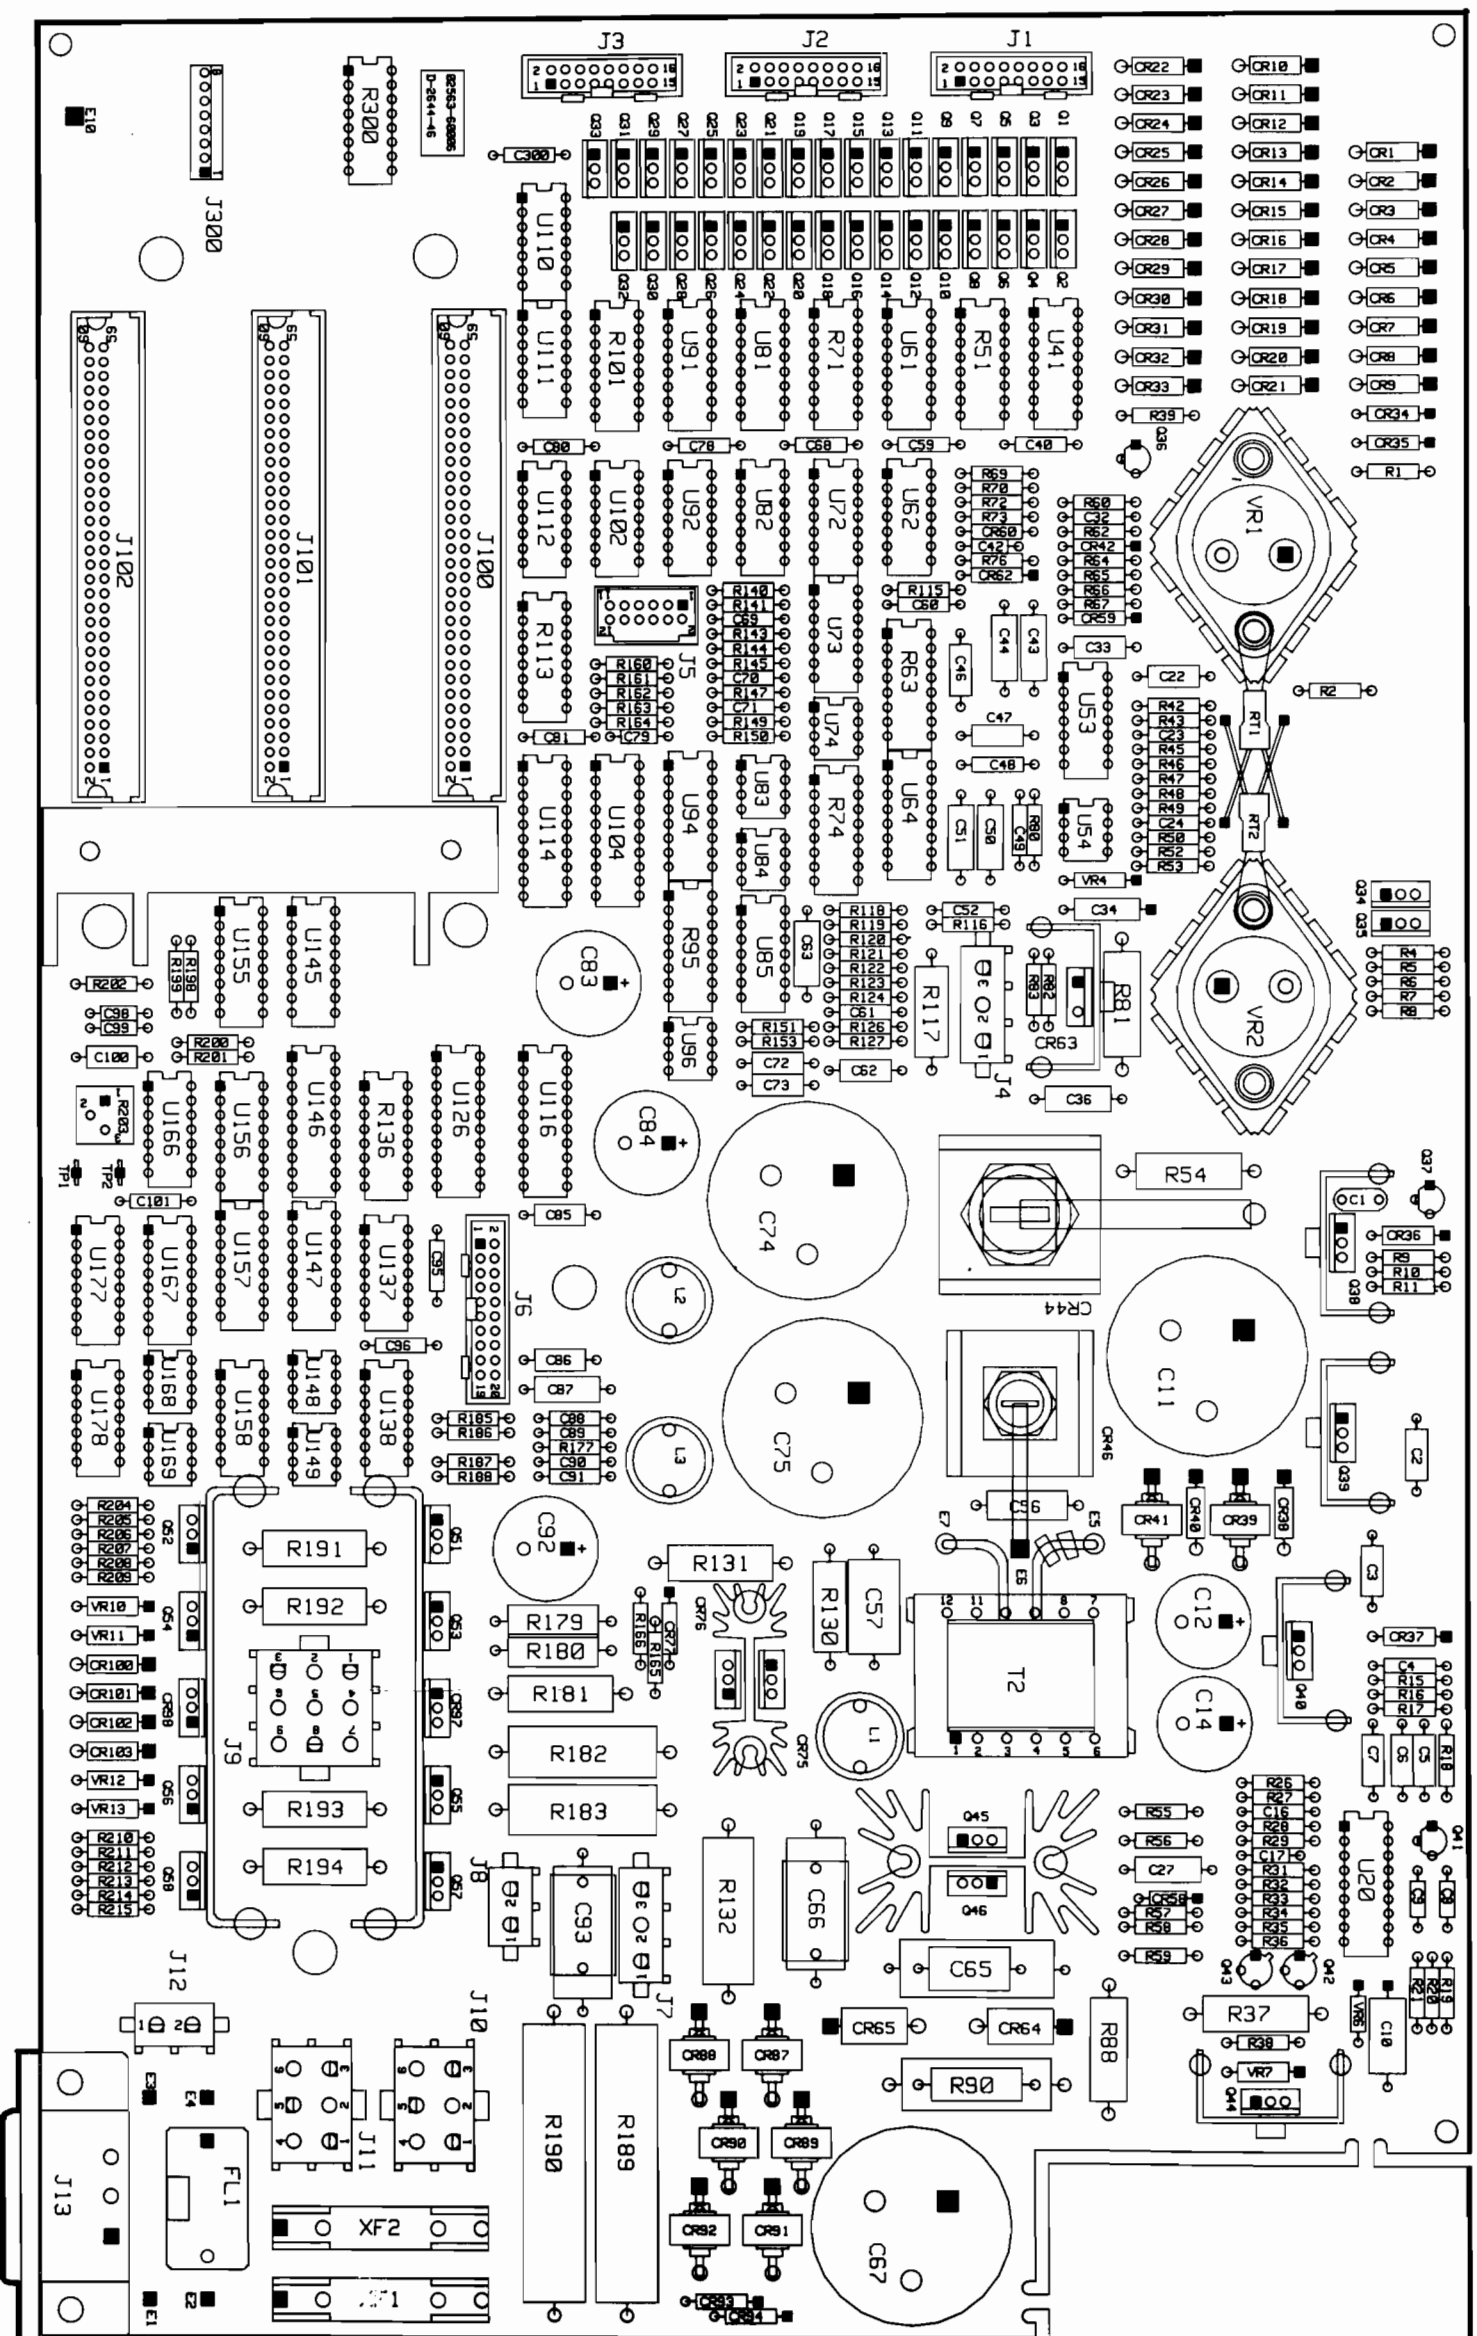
Analog/Backplane PCA (02563-60006)
